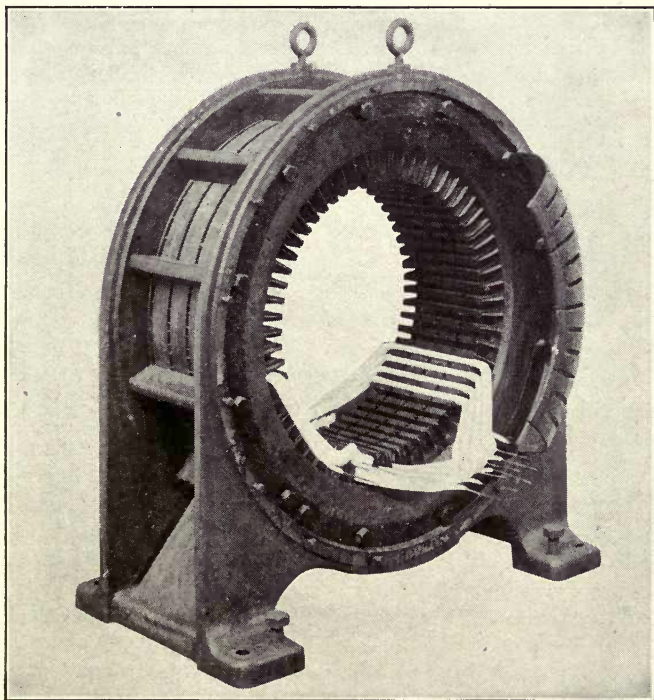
Windings partially assembled in a 25-cycle synchronous motor.
